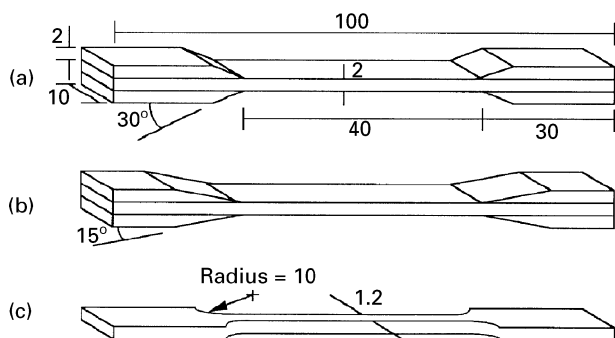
Tensile test specimen geometries (a) parallel-sided specimen with 30° end tabs (b) parallel-sided specimen with 15° end tabs (c) dog-bone specimens.
